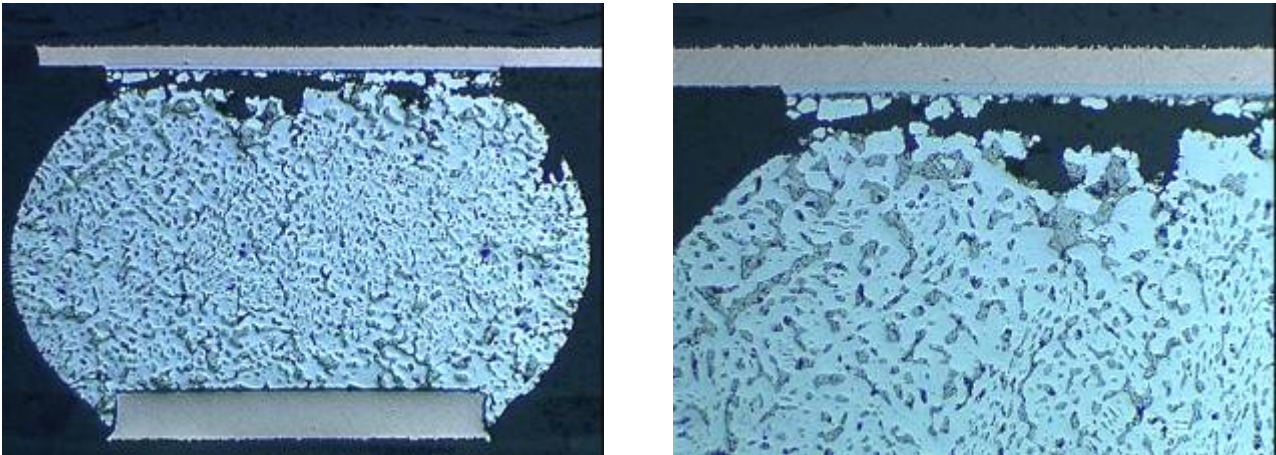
(left) BGA-225 SnPb-SnPb solder joint; (right) magnified view of solder joint crack path (test vehicle 58)
